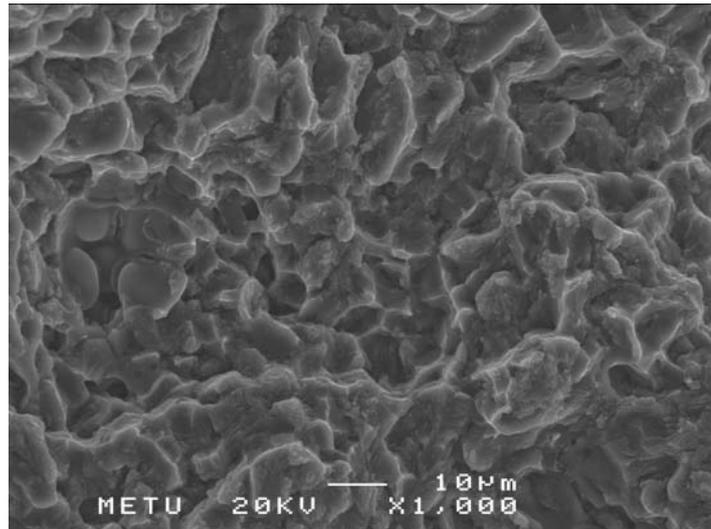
Fracture surface of AlSi7Mg0.8 alloy squeeze cast at 800 °C
